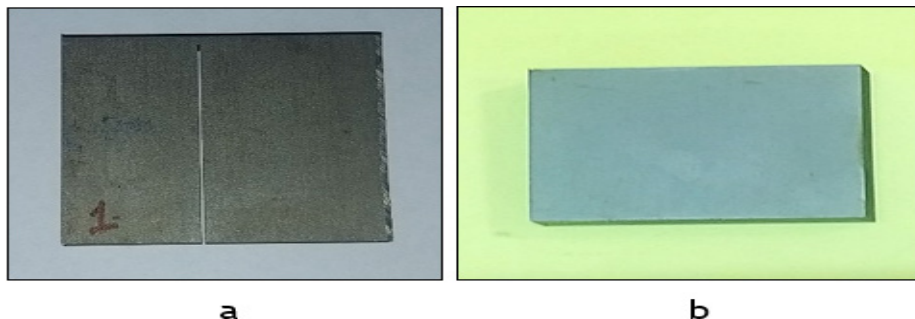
a) The Workpiece before Machining b) The Workpiece after Machining
